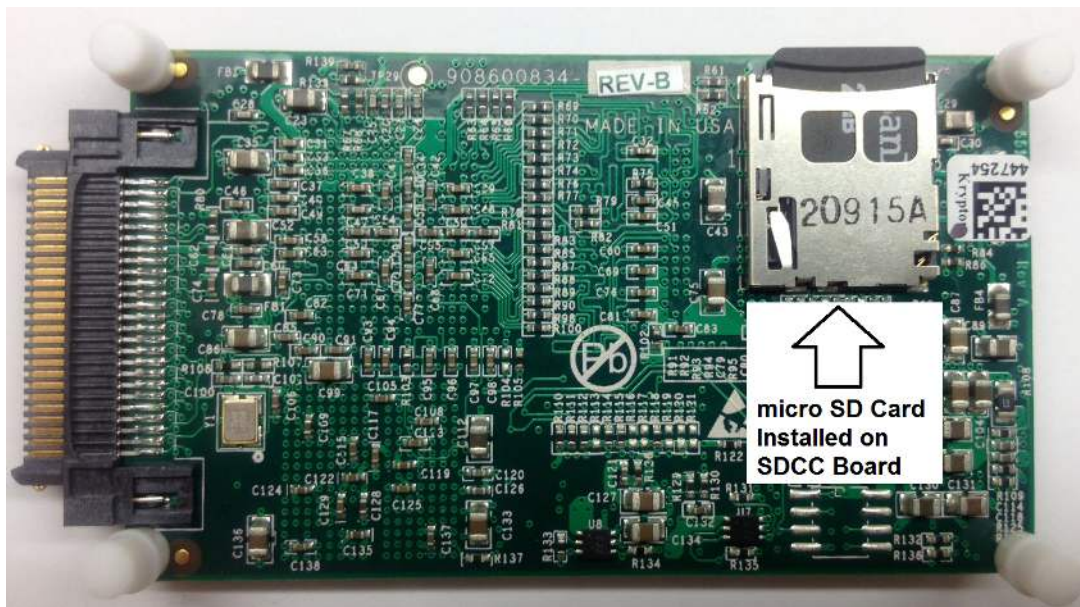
Bottom View of Simple Capture Card Board with microSD Memory Card Installed
